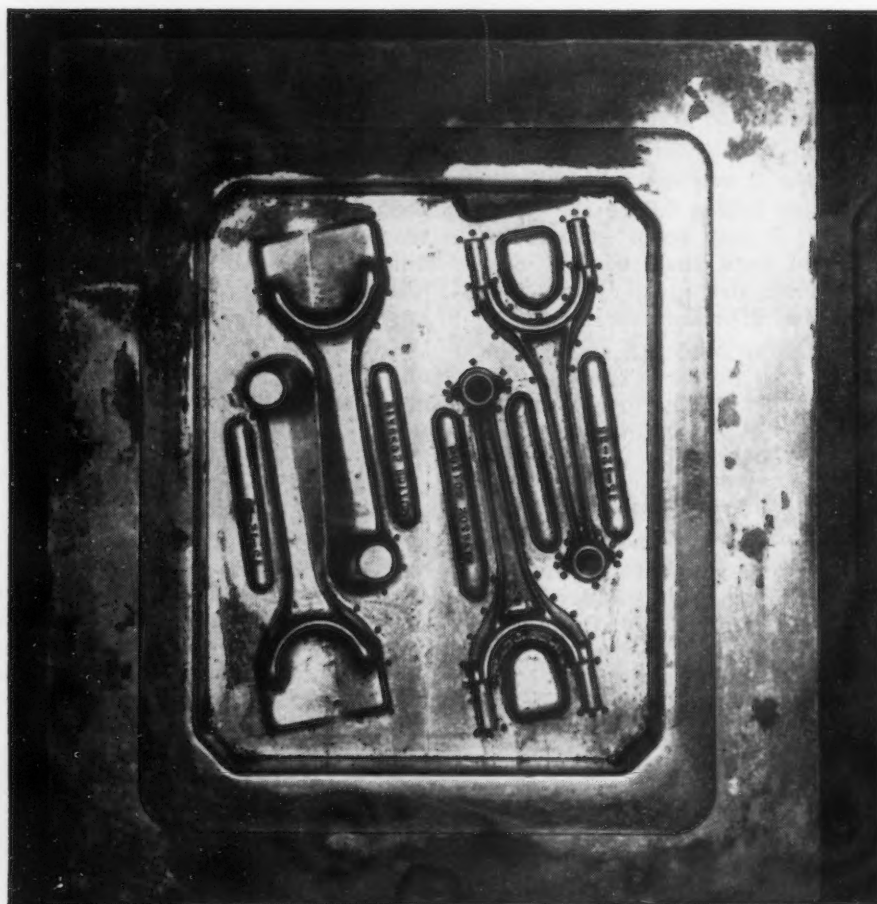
This is a complete male master die in retaining blocks. It consists of the blocker die insert at left and finisher die insert at right, mounted in a single retainer block after being prepared in the machine shop and after annealing. It is ready now for use to type production die inserts, as shown at the left in Fig. 9. (As can be observed, this connecting rod design is different from the one shown in Fig. 9.)
